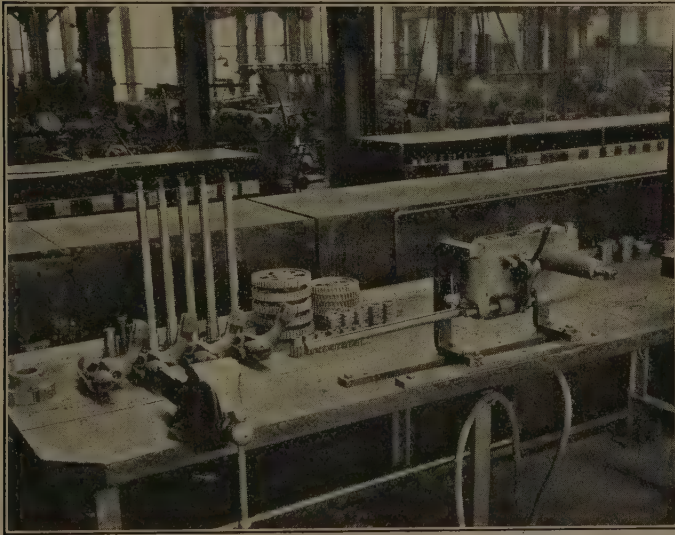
SUB-ASSEMBLY OF APRON PARTS
